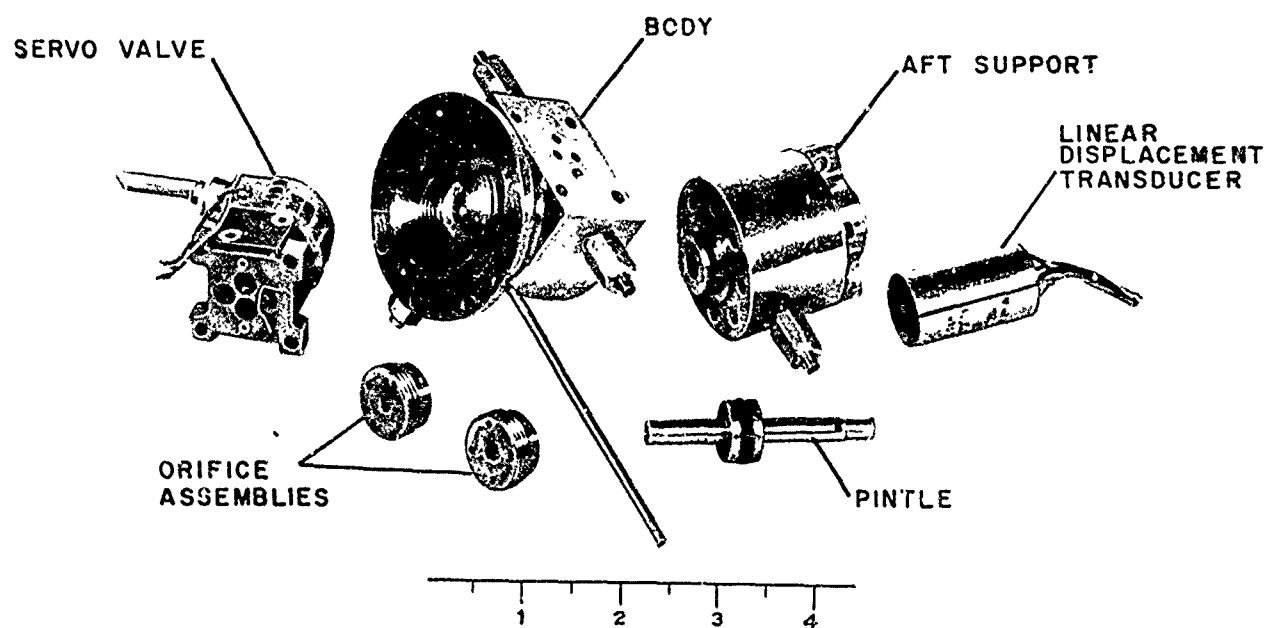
Exploded View of Variable-Area-Injector Assembly Hardware.
